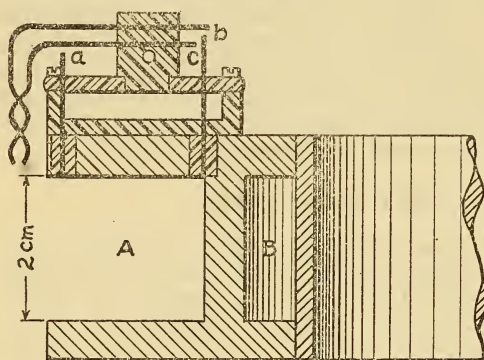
Crosssection of the form of a large fixed coil at a terminal block, showing the leads.
